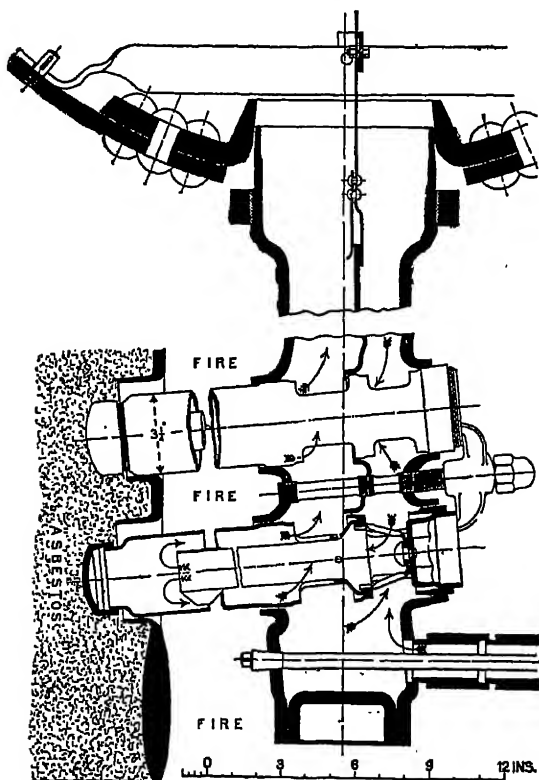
Header and Evaporative Tube Ends of Niclausse Boiler
